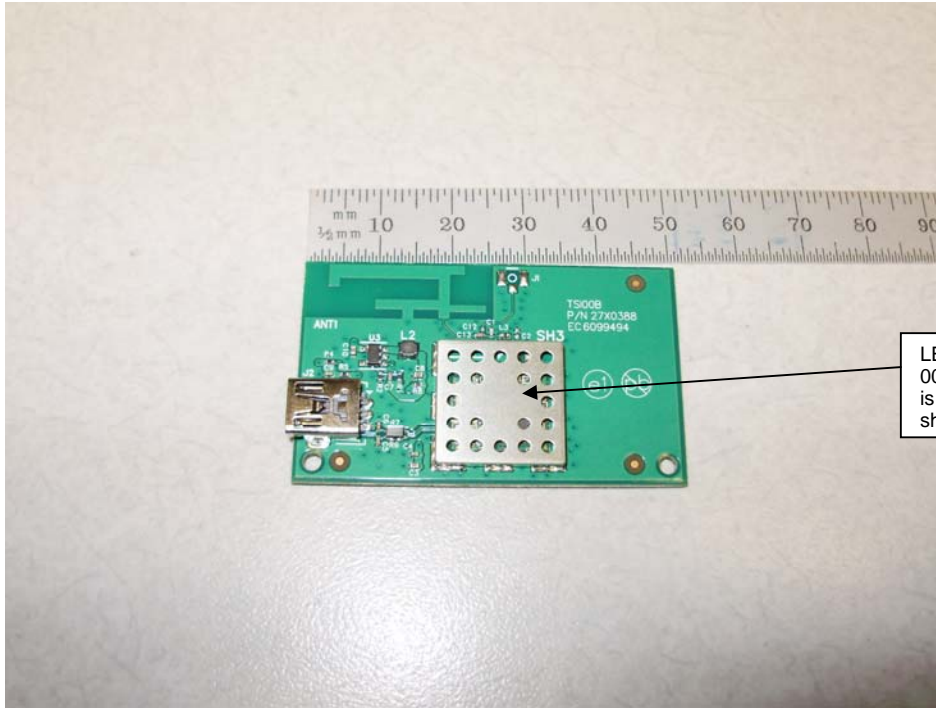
showing LEX-M08-001 module on host PCB under a shield.
